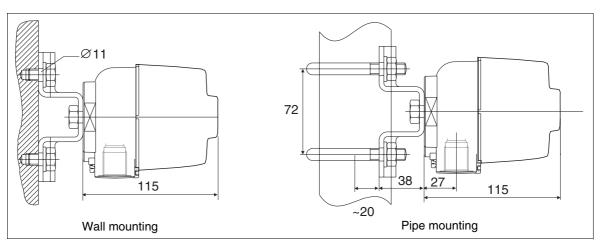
Wall mounting and pipe mounting TF202 / TF202-Ex (all dimensions in mm)
